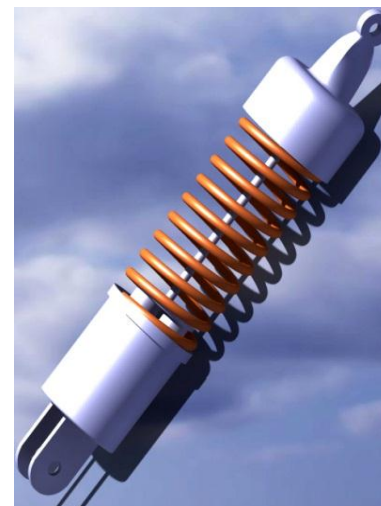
Fig. IV. (b) Assembled view of proposed spring-damper system modelled in CATIA V5
